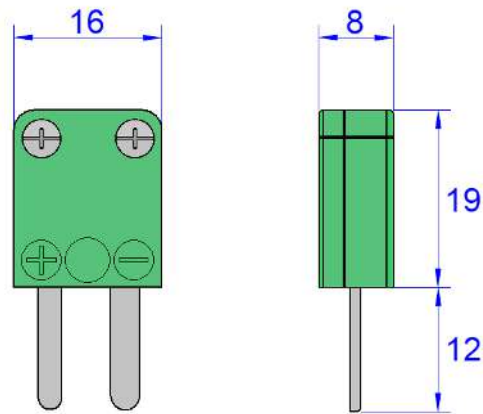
Figure: mini thermocouple plug (dimensions only as guide values)
